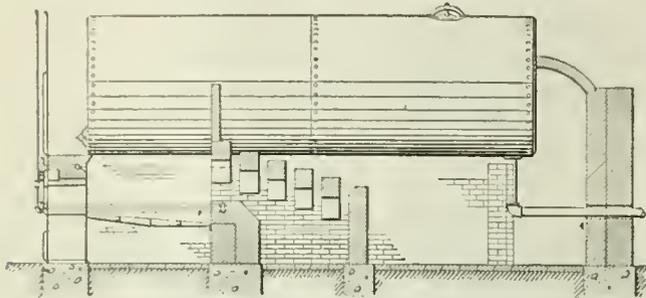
ONE OF THE FANCY FURNACE DESIGNS WHICH SHOWED A SLIGHT IMPROVEMENT
